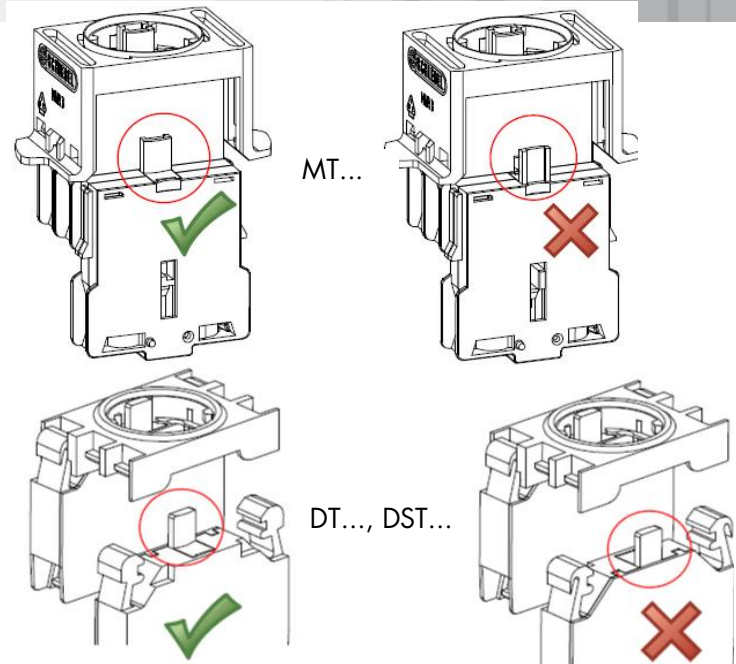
Correct assembly of the modular contact blocks MT..., DT..., DST...
